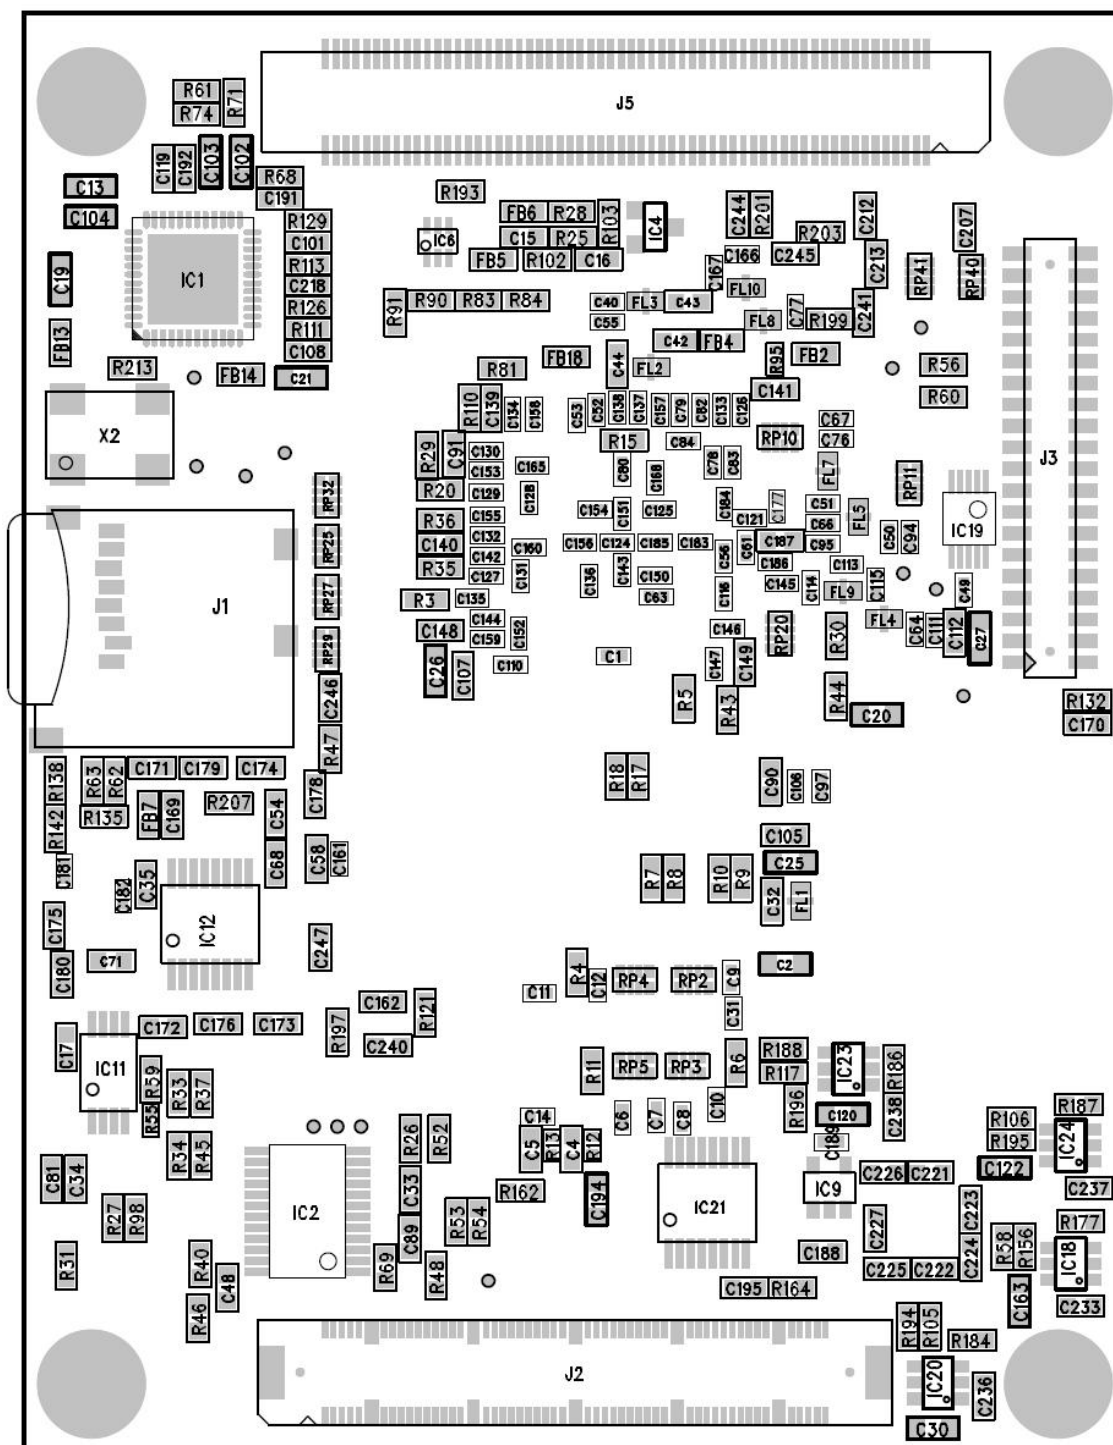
BLACK365 COMPONENT PLACEMENT – BOTTOM SIDE
